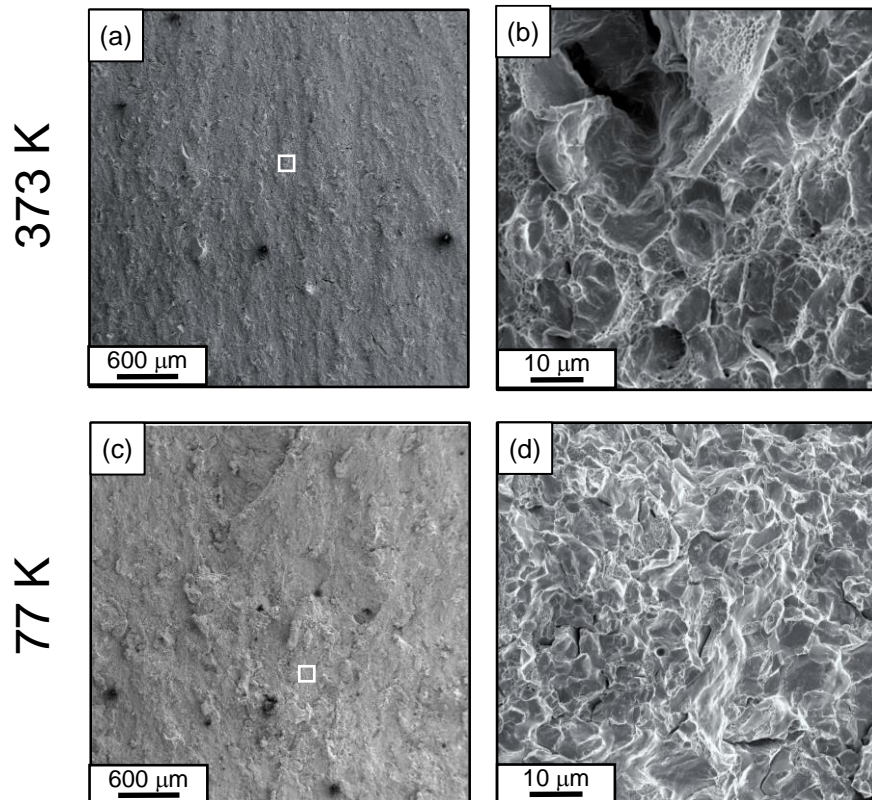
Fracture surfaces of 5C at (a)(b) 373 K and (c)(d) 77 K. ((a)(c) low magnification and (b)(d) high magnification)
